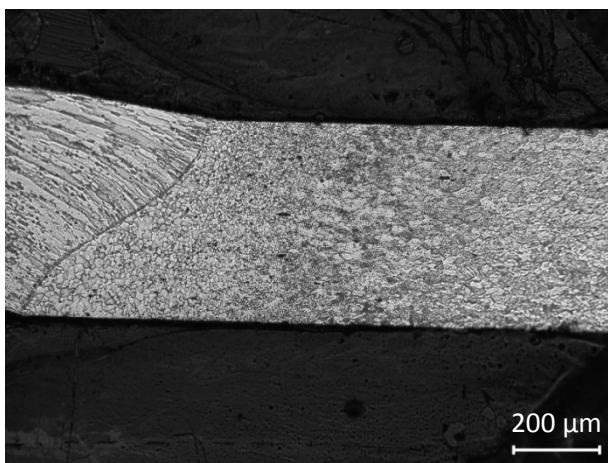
Macrograph of N-N 0.5 mm thick similar joint showing the welded zones
